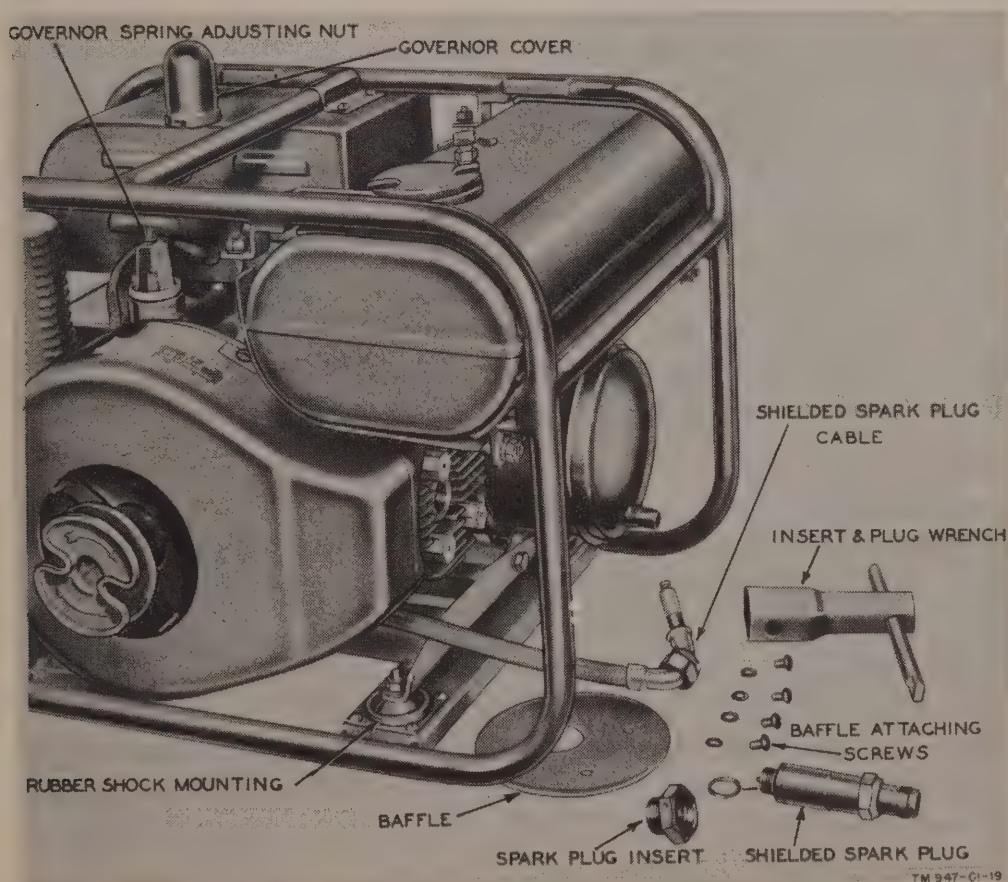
Power Unit PE-210-B, spark plug, spark plug adapter, and ignition shielding.
